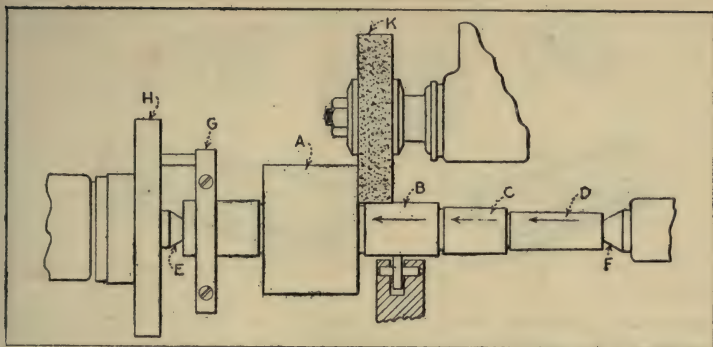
METHOD OF SETTING UP A GRINDING MACHINE FOR EXTERNAL CYLINDRICAL GRINDING
